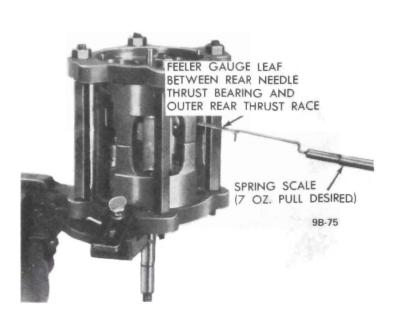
B-86 Checking Drag on Selected Feeler Gage Leaf with Spring Scale
